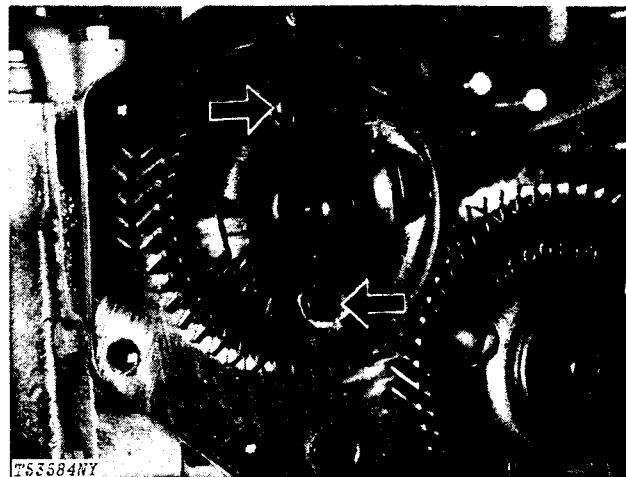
Remove Camshaft Thrust Plate Cap Screws
